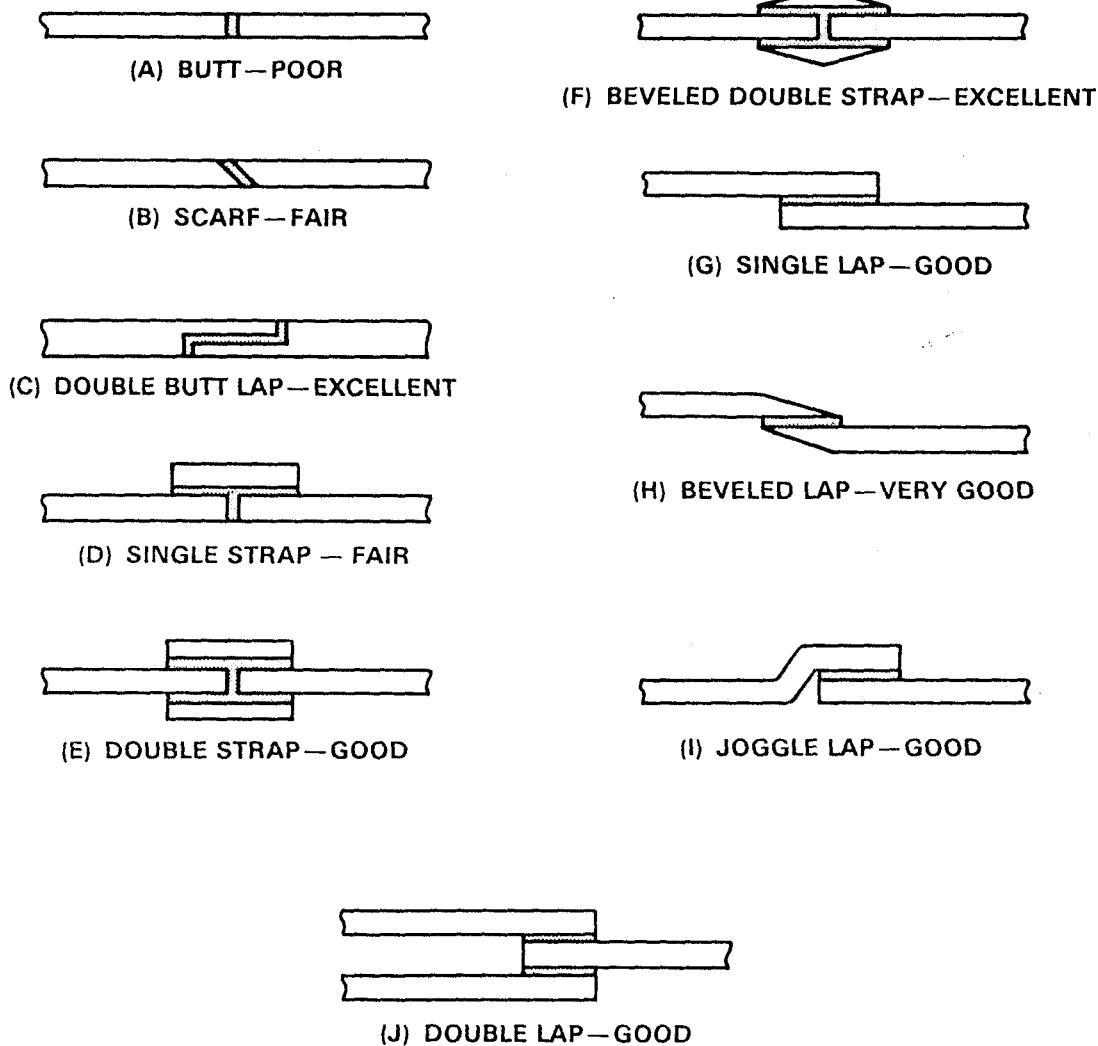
Adhesive Bonded Joint Designs for Sheet Metal
